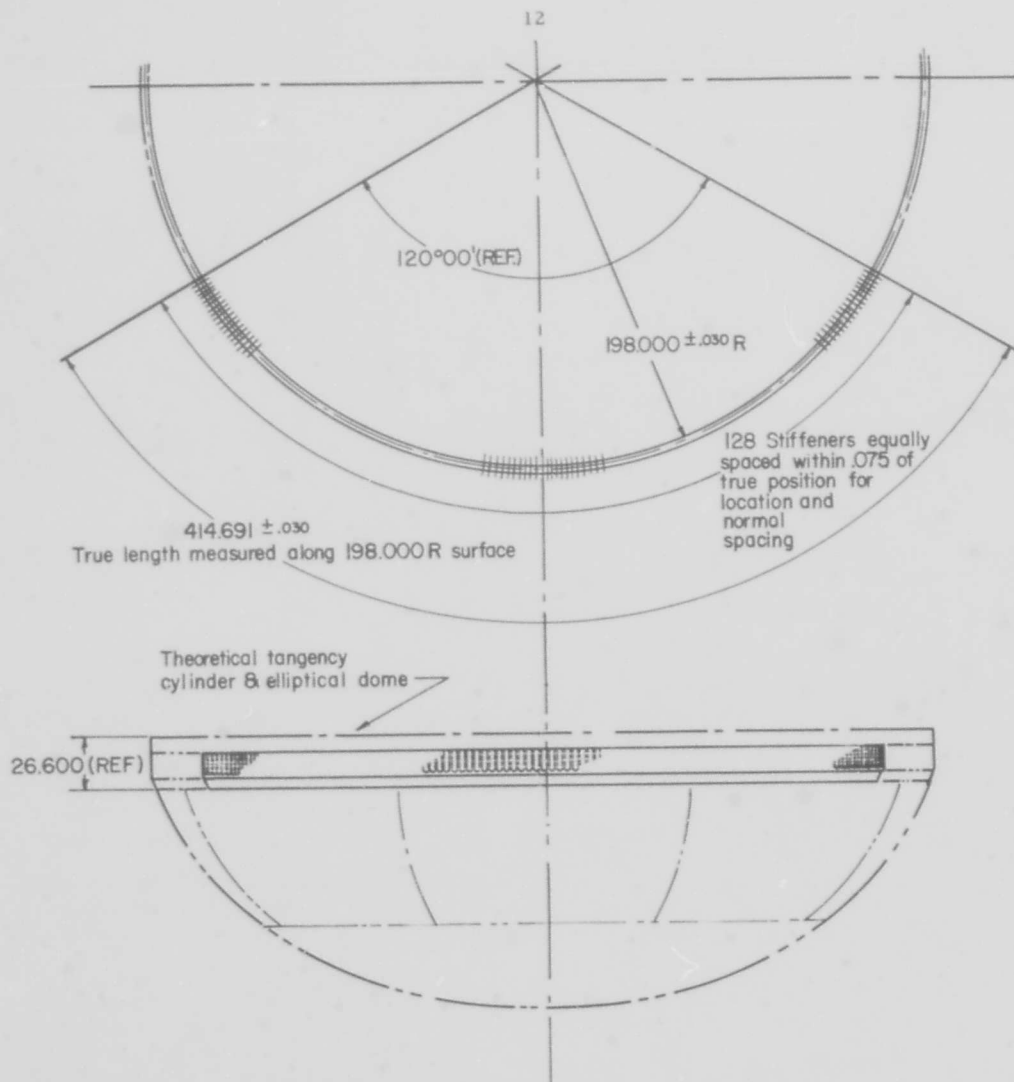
DRAWING OF FULL-SCALE Y-RING SEGMENT FOR THE S-1C FUEL TANK⁽⁶⁾
